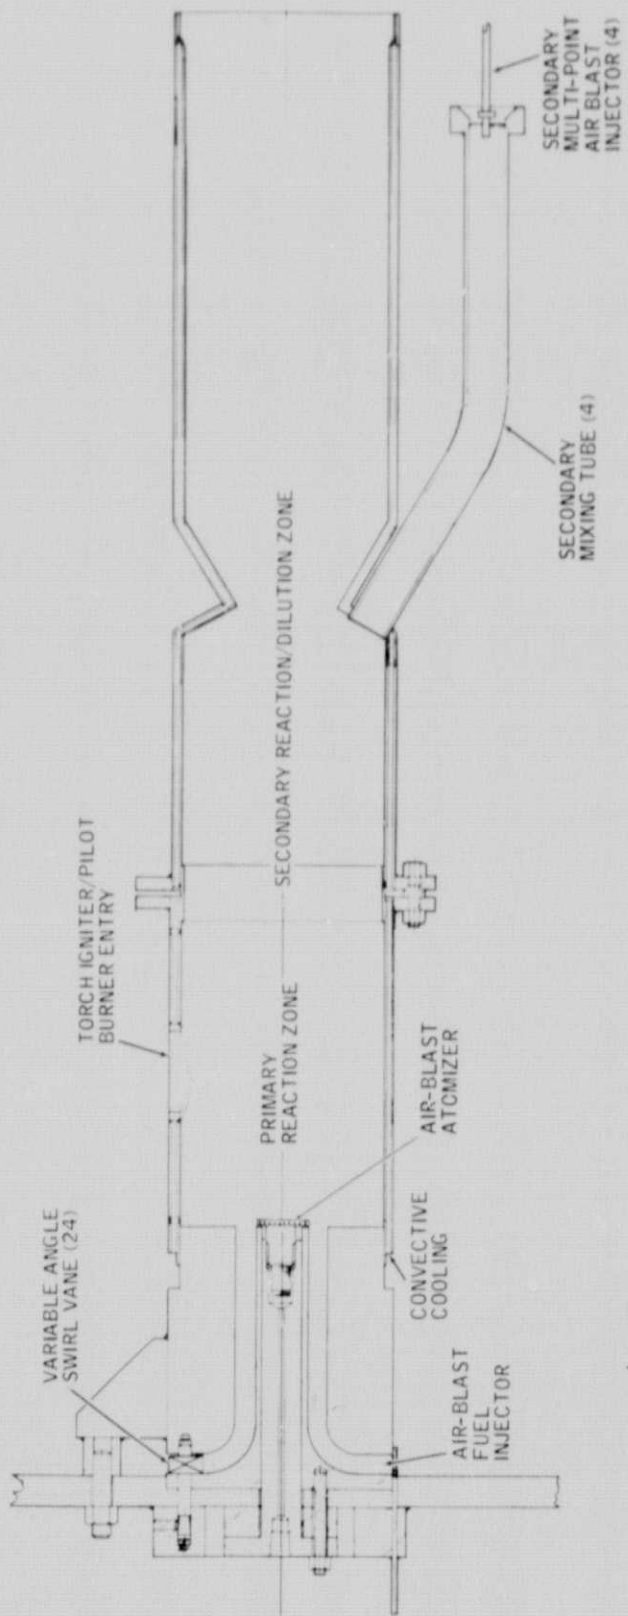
VAB Combustor Details - Axial Fuel-Staged
